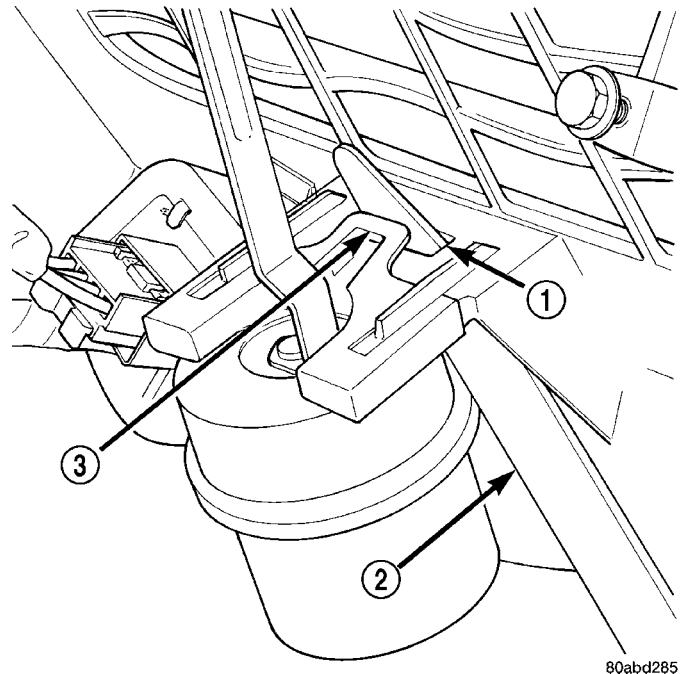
VACUUM ACTUATOR REMOVE/INSTALL - TYPICAL
